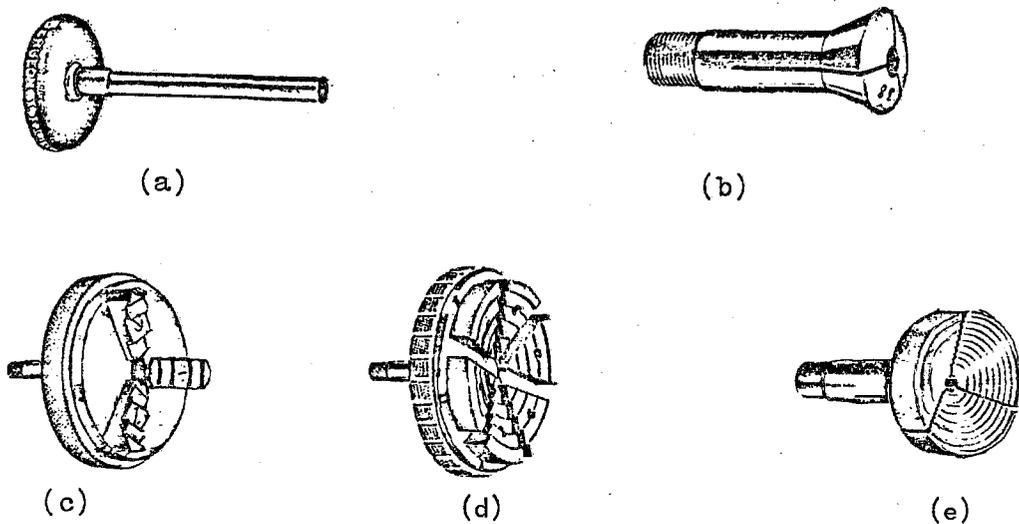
Turning-lathe collets: (a) split-chuck collet clamping screw; (b) ordinary split-chuck collet; (c) universal three-chuck; (d) universal six-chuck; (e) disk split-chucks collet
